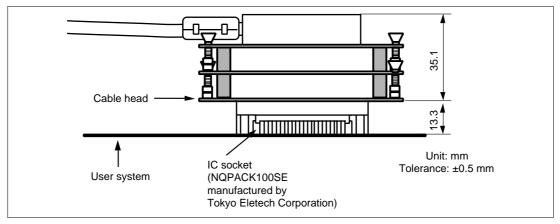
Resulting Dimensions after Connecting User System Interface Cable
